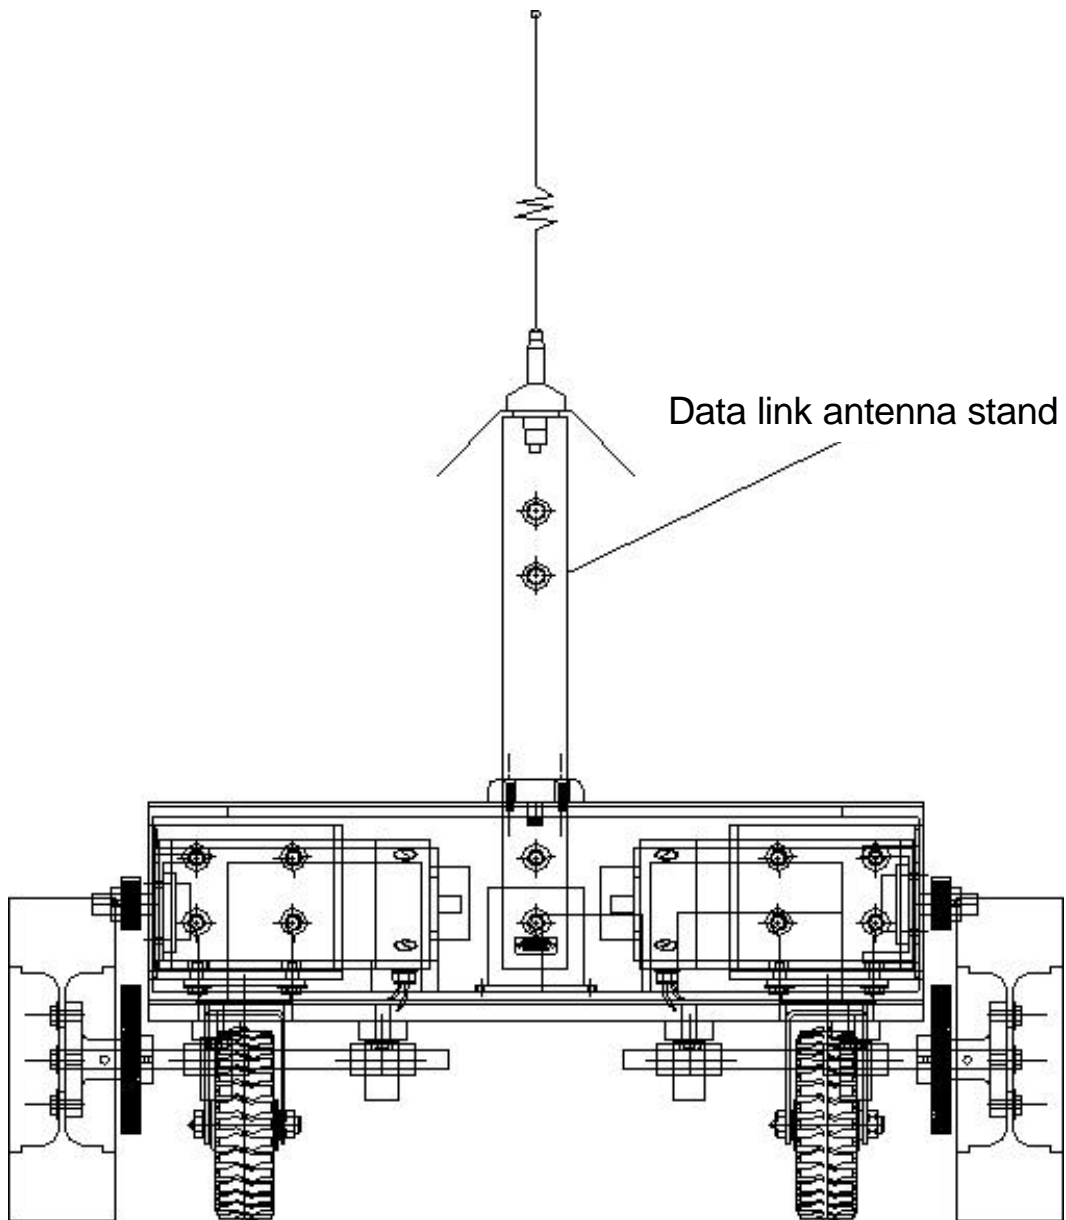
Leonard Assembly, Front View (Drawing Courtesy of John Christ)
